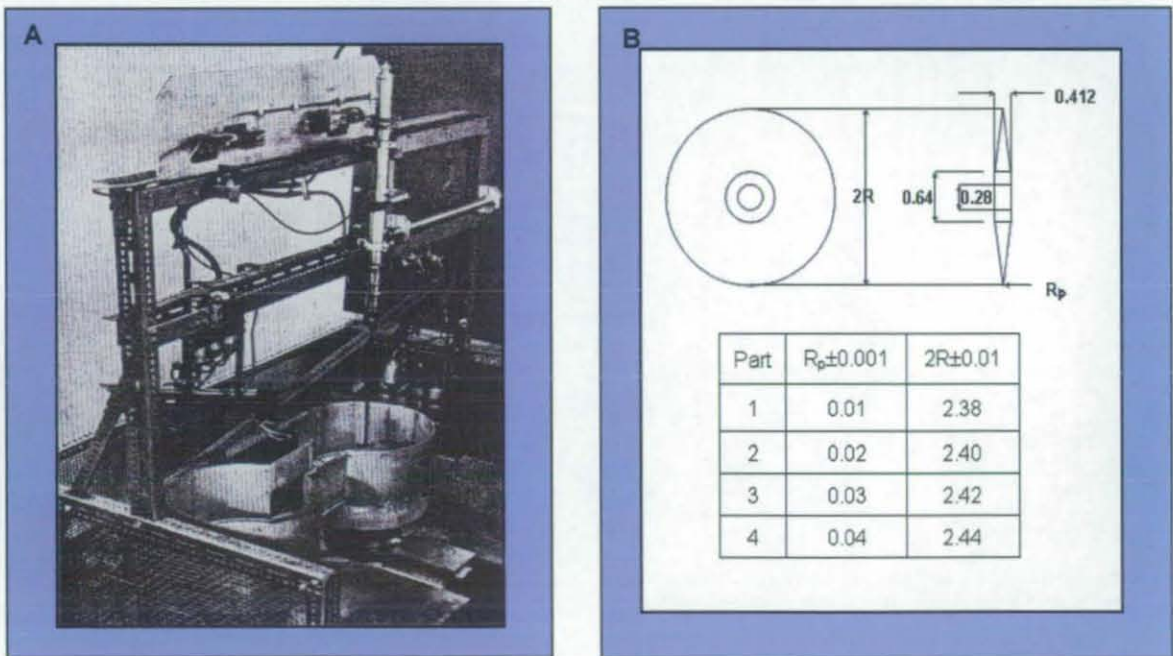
4 (A) Fluidised bed test equipment (Glenny et.al., 1959); (B) Thermal fatigue test specimen (measurements in inches)
